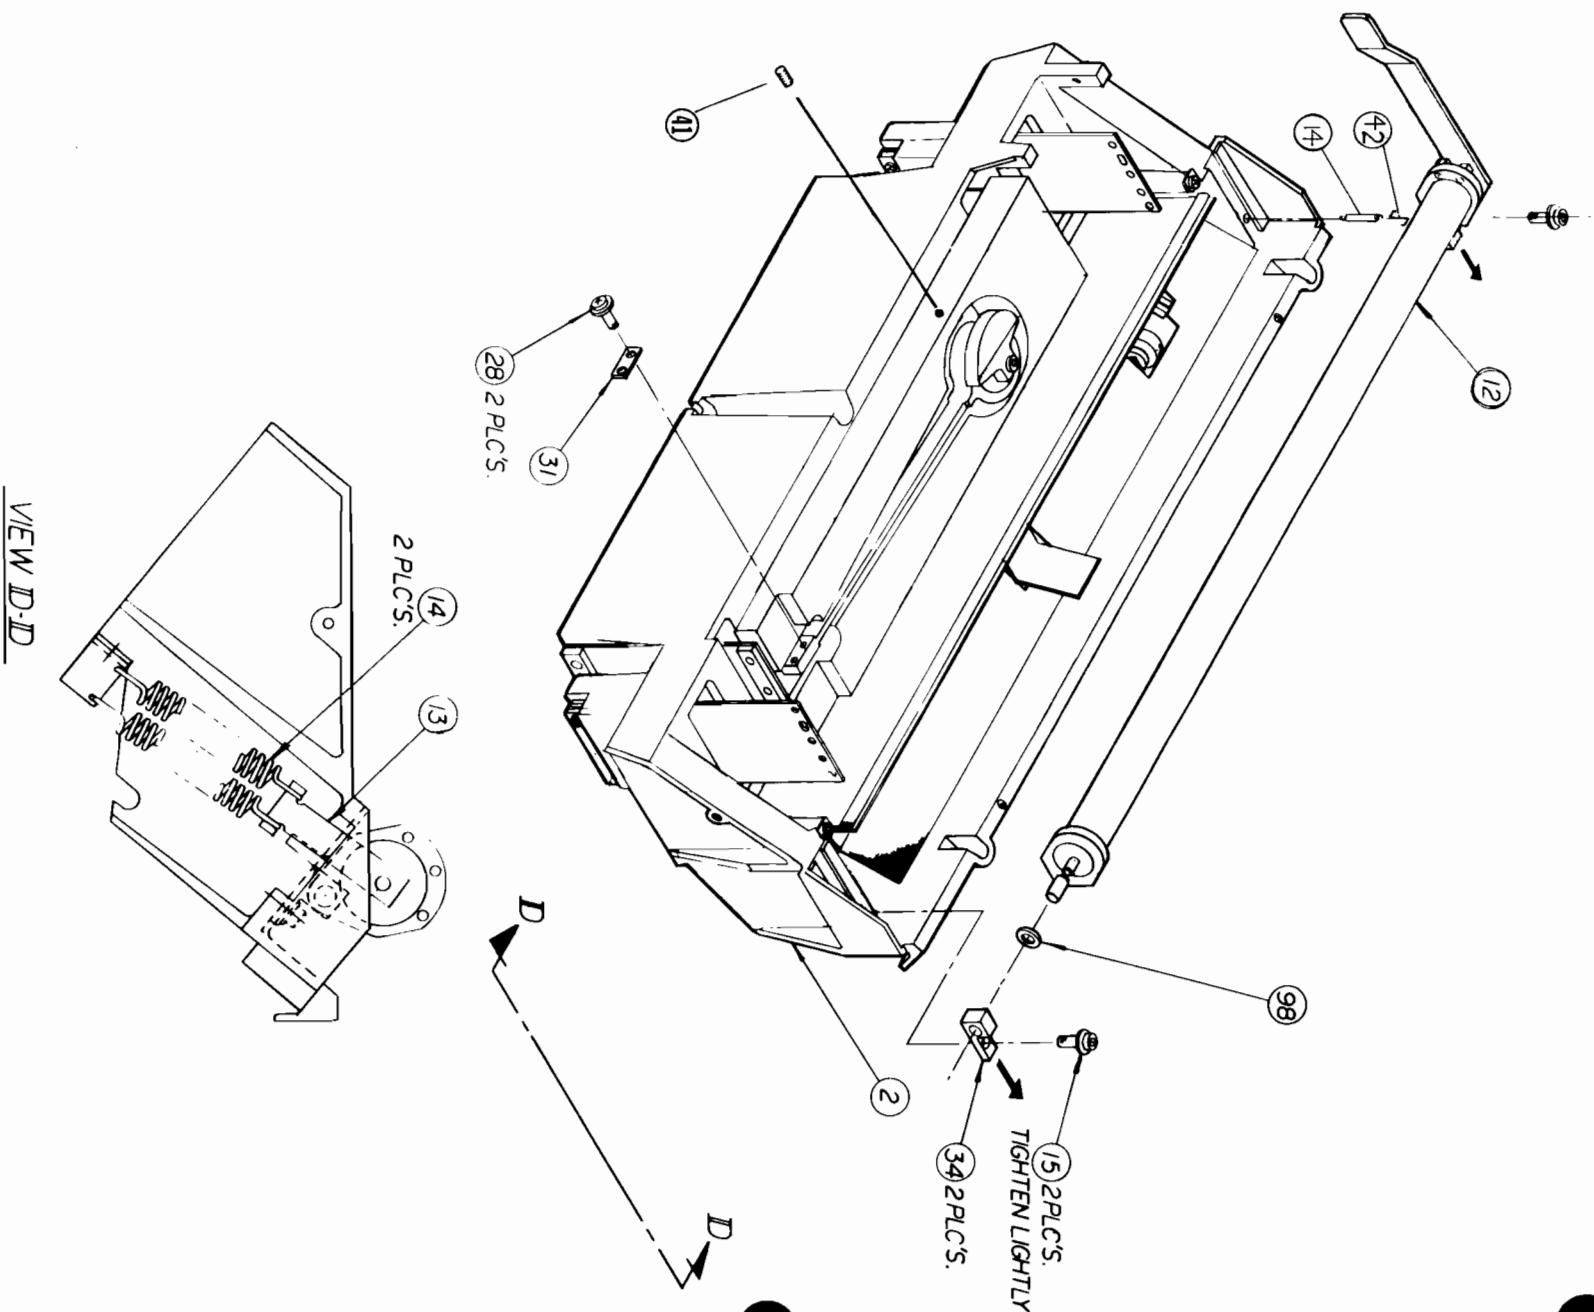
PRINT MECHANISM ASSEMBLY PARTS
